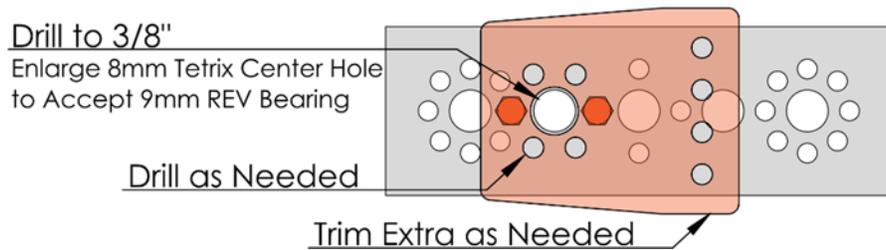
Mounting REV Robotics Brackets to Tetrax Channel
